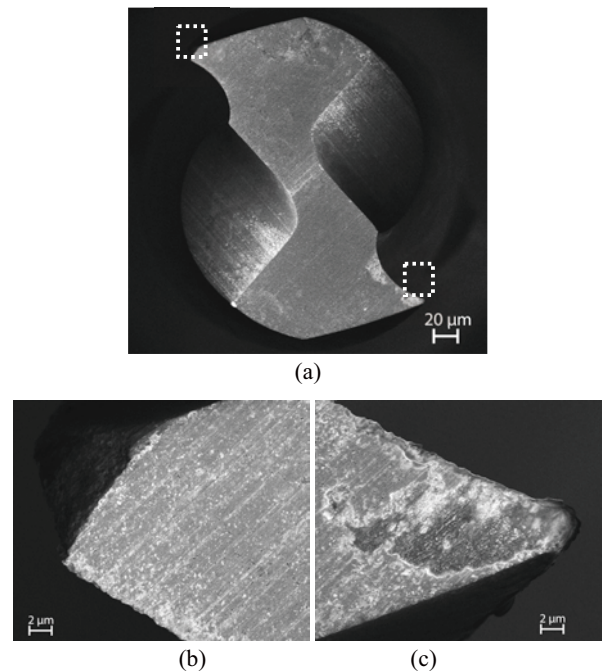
SEM micrograph of CII + NCD coated: (a) tool, (b) left, and (c) right cutting edges after 250 mm of linear milling.
